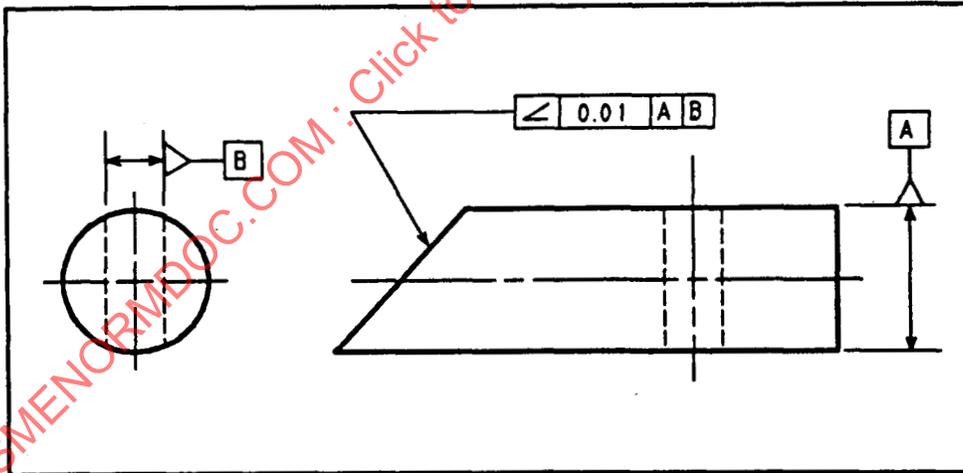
PLANAR ANGULARITY OF A PLANE; PRIMARY DATUM AXIS; SECONDARY DATUM AXIS CONTROLS ROTATION OF THE TOLERANCE ZONE ABOUT THE PRIMARY DATUM AXIS
